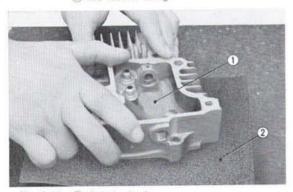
1 Cylinder head 2 # 400 emery paper
